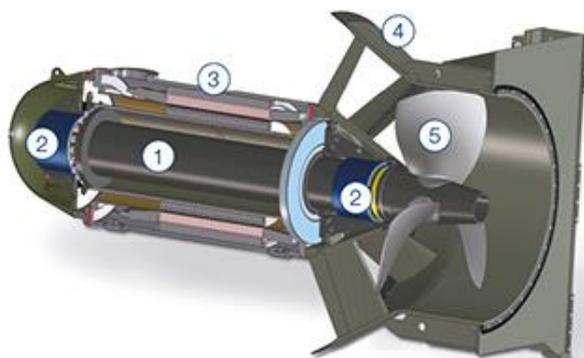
General Run-of-River Power Plant Concept with StreamDiver (Quelle:Voith StreamDiver®, New Plant Concepts for Low Head Hydro Power – www.voith.com)
